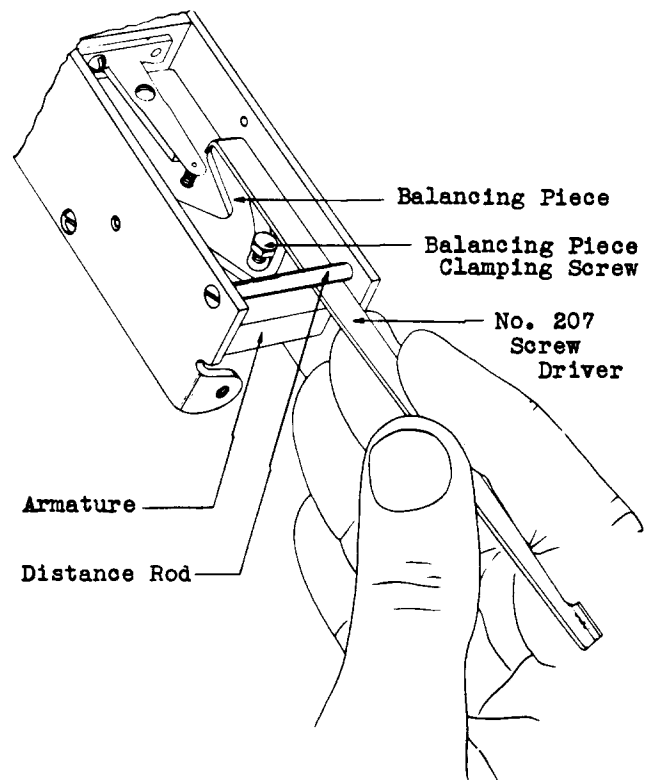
Method of Adjusting Relay Equipped with a Balancing Piece
